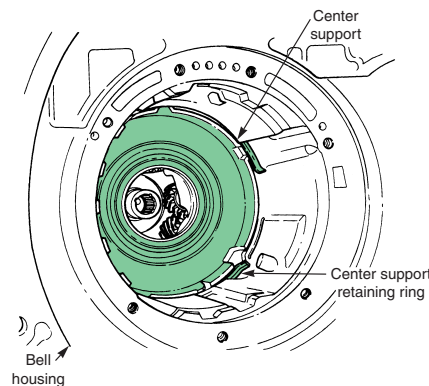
Many modern transmissions and transaxles have a center support. The support shown here is held in place with a retaining ring, which must be removed before removing the rear planetary gearset and holding members, as well as the output shaft. (Ford)
